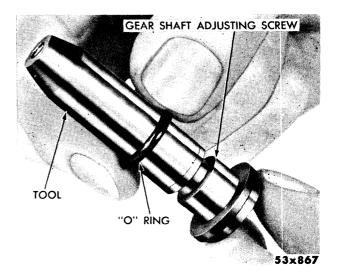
Installing Gear Shaft Adjusting Screw "O" Ring (Tool C-3401)
